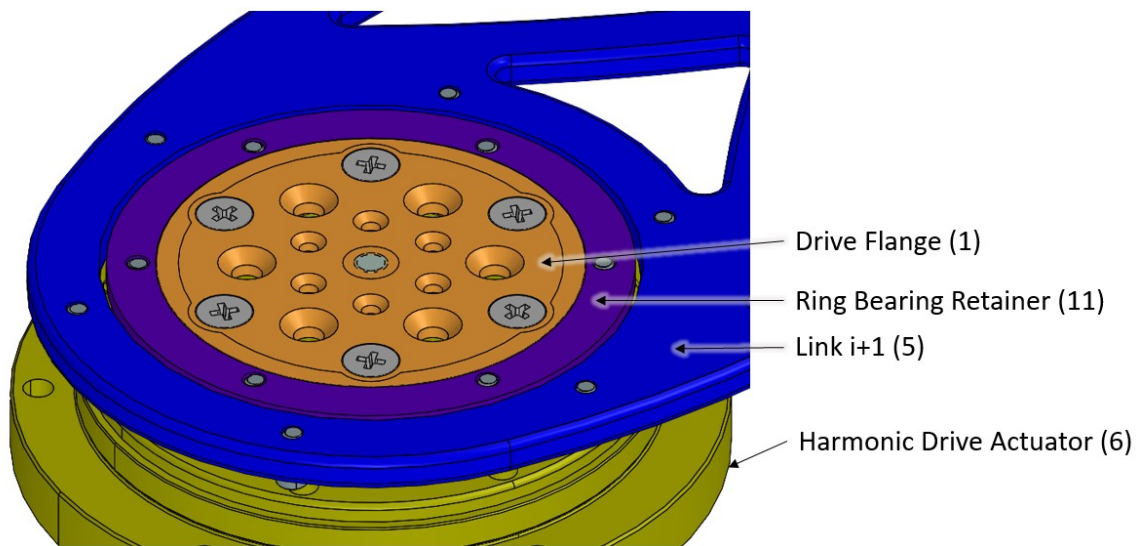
VSA joint angle driver. Drive flange is mounted to harmonic drive actuator. The ring bearing isolates link $i+1$ from the harmonic drive attached to link i .
